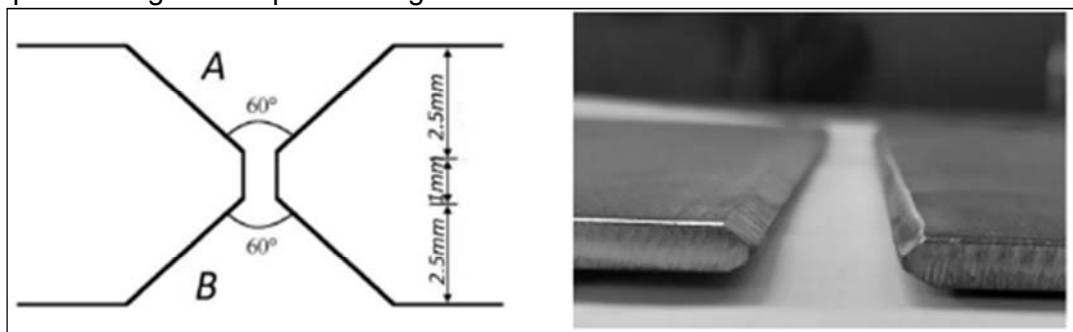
Sample 2, preparation with X-shaped groove for butt welded joint
